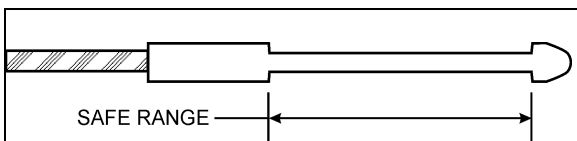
ENGINE OIL LEVEL DIPSTICK
